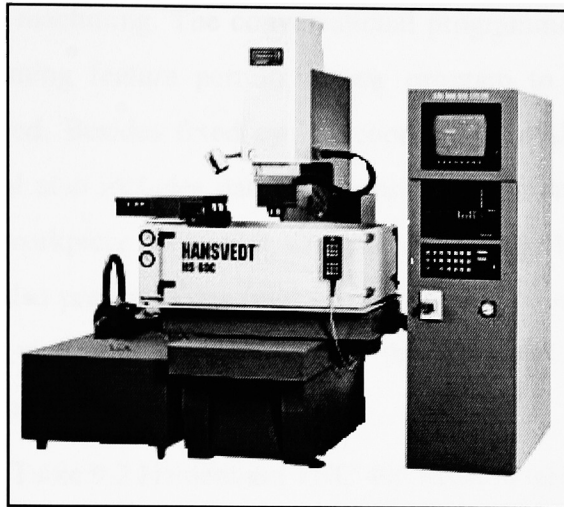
Hansvedt MS-50C 5 Axis CNC RAM EDM machine
